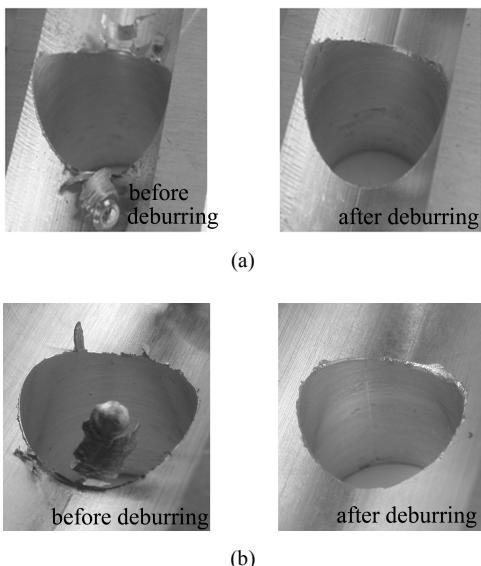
Burr edges before and after deburring Al6061-T6 at a spindle speed of 350 rev/min and an axial feed rate of 20 mm/min: (a) Primary hole dia. 13 mm; Secondary hole dia. 13 mm; Intersecting angle 90°, (b) Primary hole dia. 20 mm; Secondary hole dia. 13 mm, Intersecting angle 90°. The cutter head diameter is 8 mm, and the slot width and slot angle are 4.8 mm and 10°, respectively.
